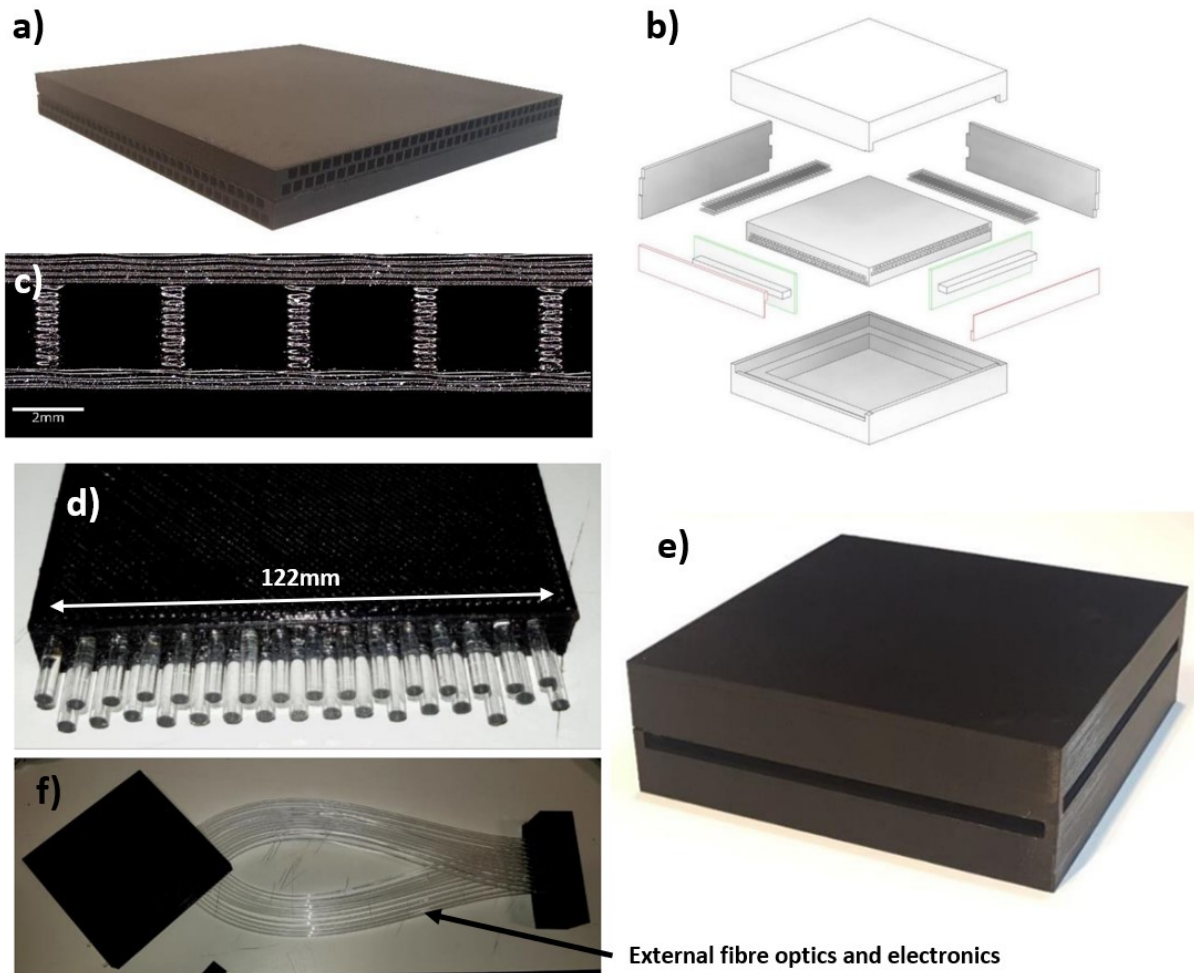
3DScints prototype design [9] a) Four layers of 2mm fibre channels, two stacked in x and two stacked in y. b) Exploded assembly of the detector. c) Microscope image of square geometry channels. d) 2mm fibre installed in channels. e) Full assembly of the detector. f) Full assembly connected with scintillating fibre to external SiPMs and FERs.
